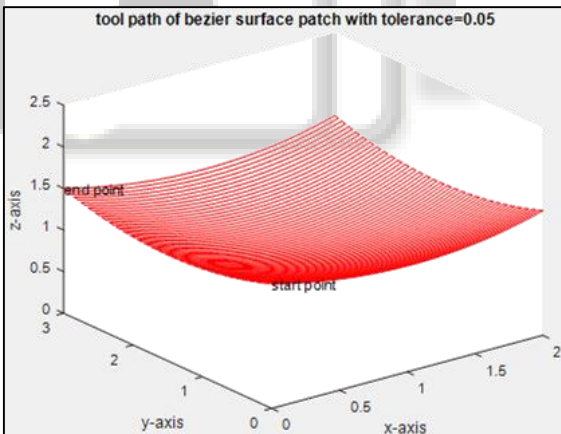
(c): Tool Path Generation of Bezier Patch for Tolerance = 0.05
